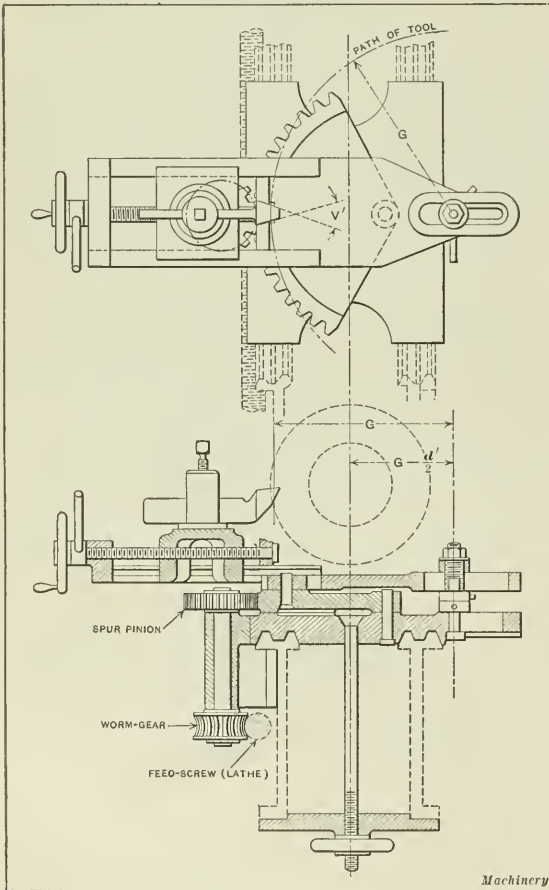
Special Fixture for cutting Internal Worms and Hobs
